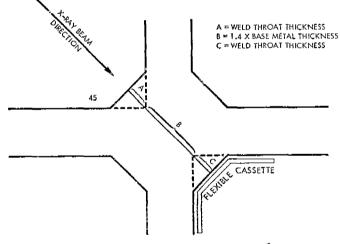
B THICKNESS OF STEEL TO BE PENETRATED WITH $45^{\rm o}$ radiography of an "X" joint weld
